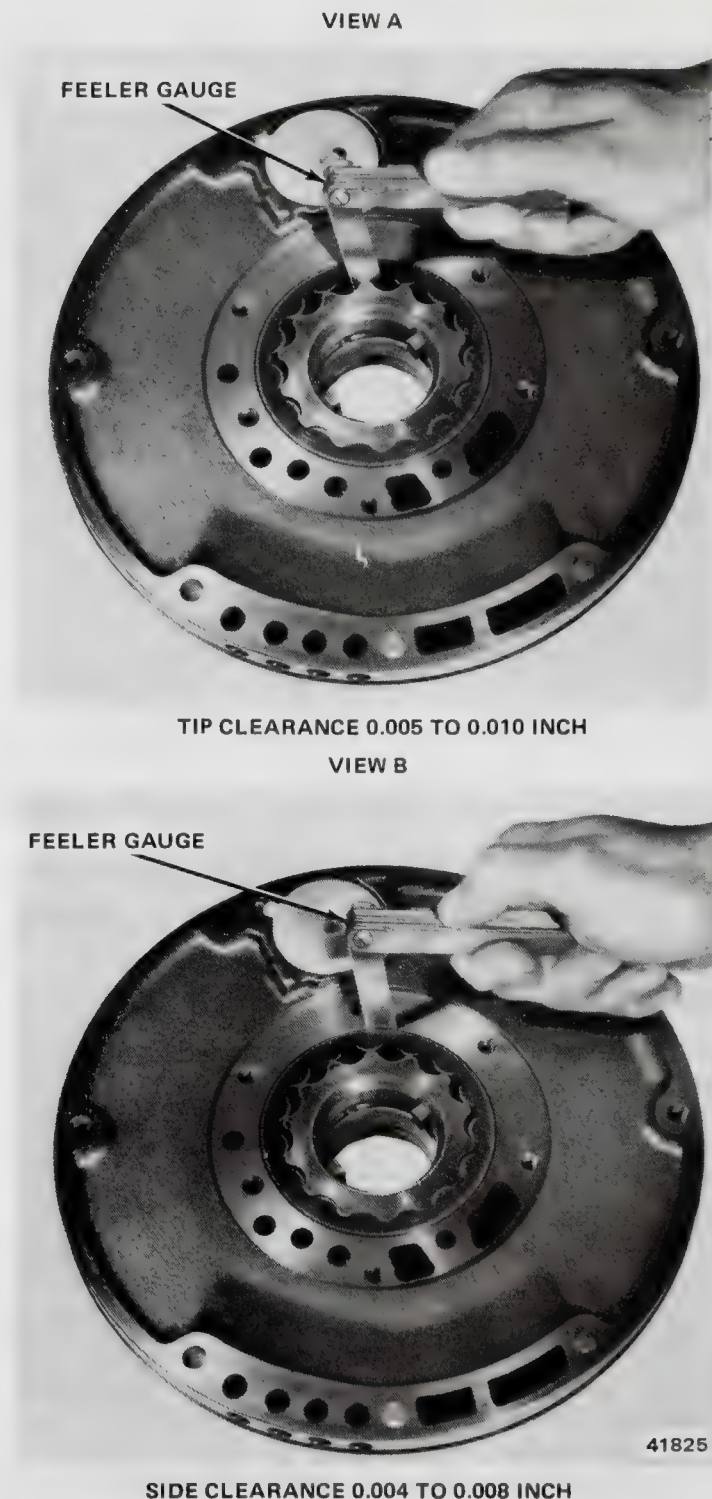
C-69 Measuring Rotor Tip Clearance—Model 727
